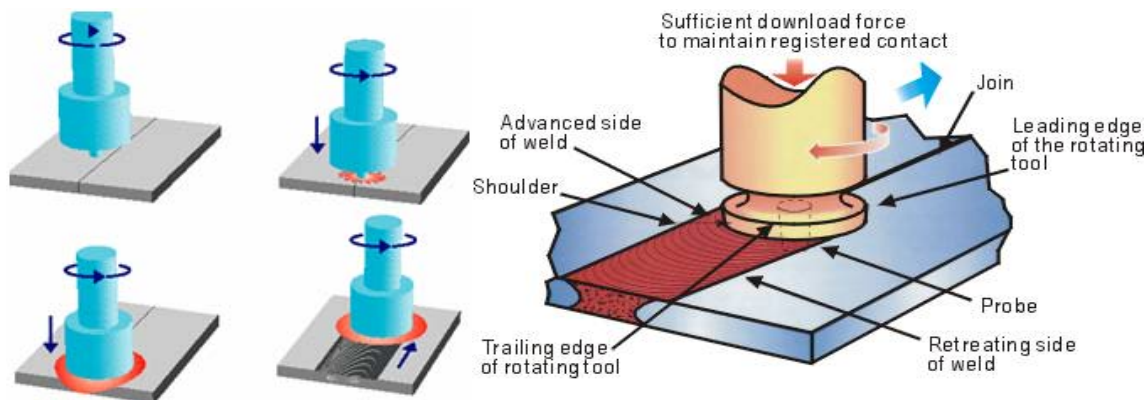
Schematic of the friction stir welding process [TWI]
